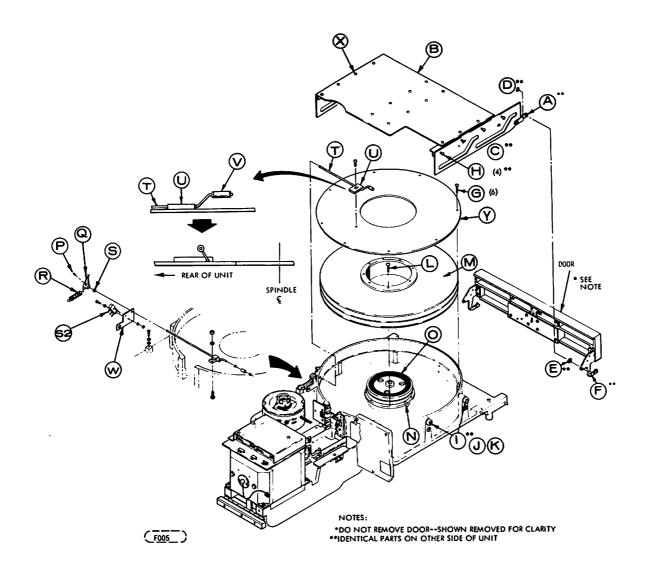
REMOVAL OF RECEIVER PLATE ASSEMBLY AND FIXED DISK PACK
